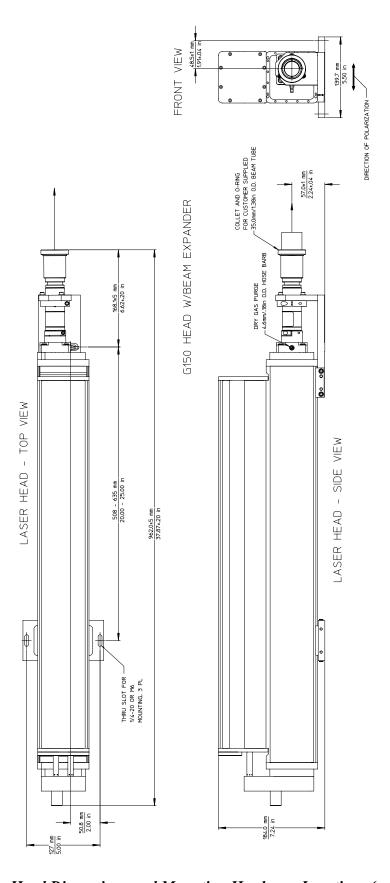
Laser Head Dimensions and Mounting Hardware Locations (w/Beam Expander)
